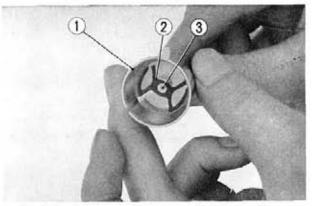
① Throttle valve ③ Jet needle ② Needle set plate
